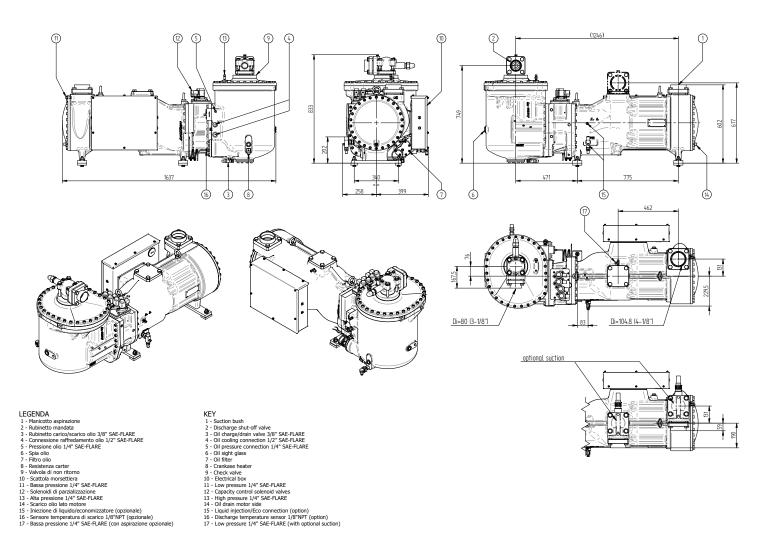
dimensional drawing of the models: RS5-L160/L180/H210/H240 (drawing code: MSI388-AB);
